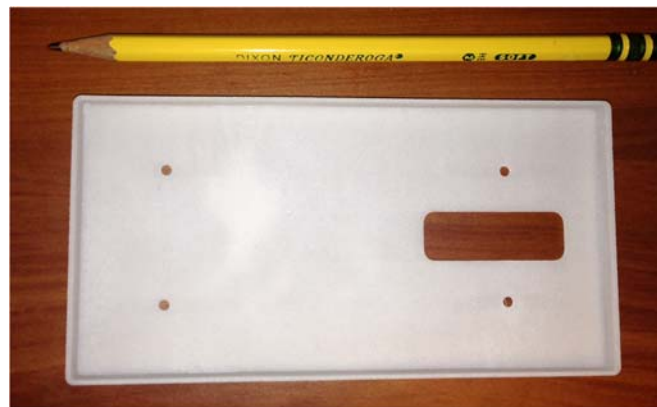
Duraform PA phone cover with sandpaper-like surface finish printed via Selective Laser Sintering
